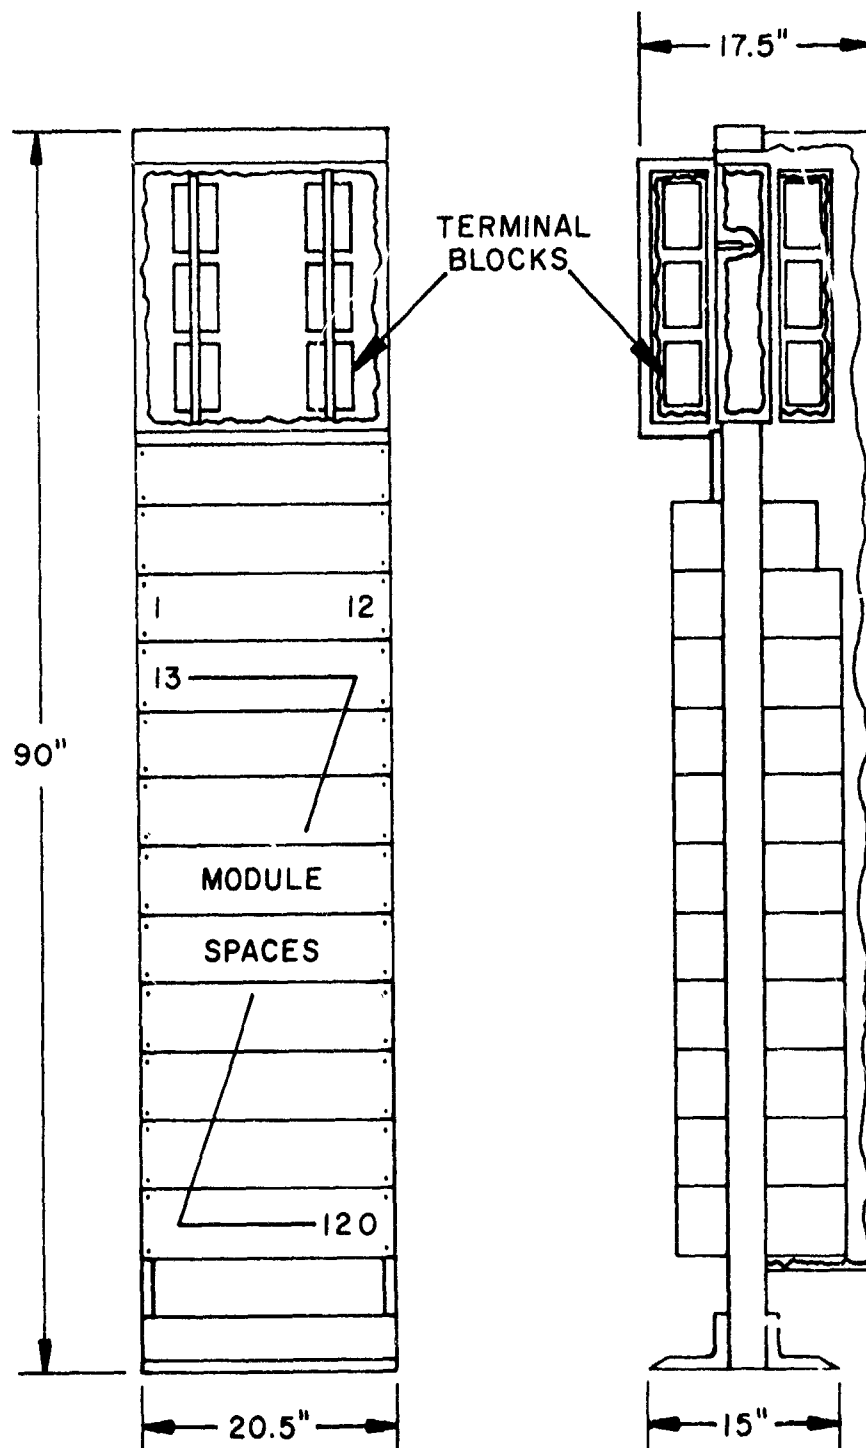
Universal conditioning equipment bay (sheet 1 of 2).
